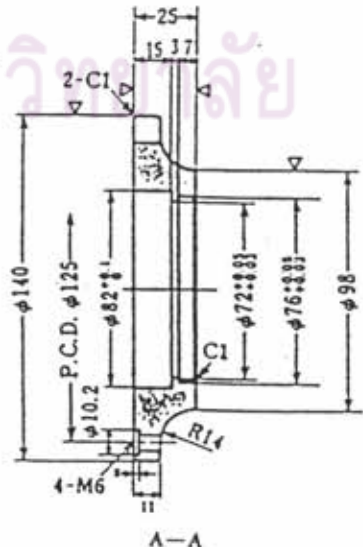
EXPLOSION TUBE SUPPORT PLATE
